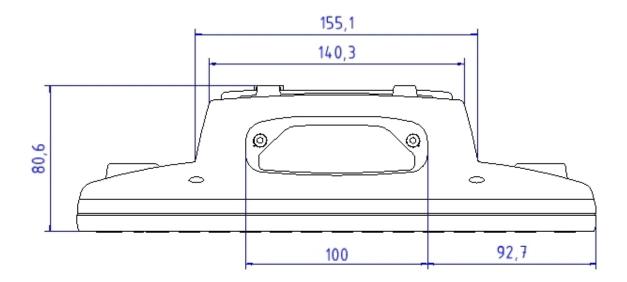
Dimensions DLoG XMT 5/10 top view
